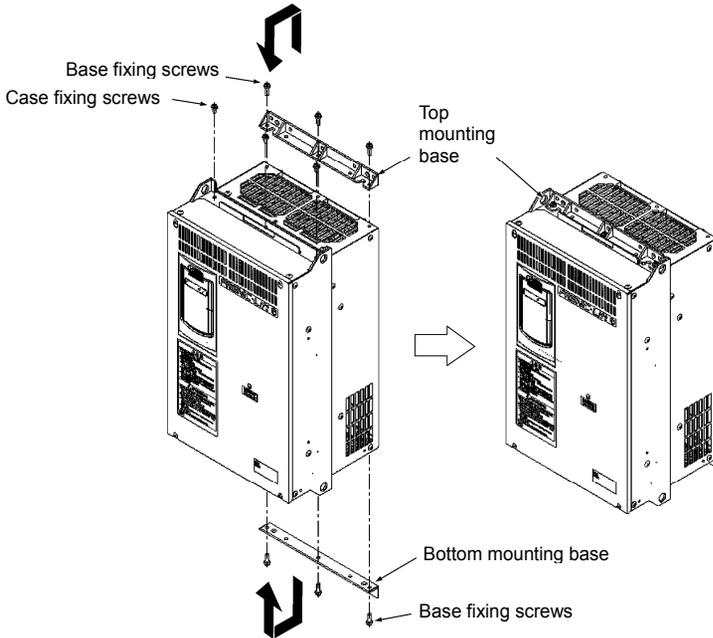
Relocating the Top and Bottom Mounting Bases
